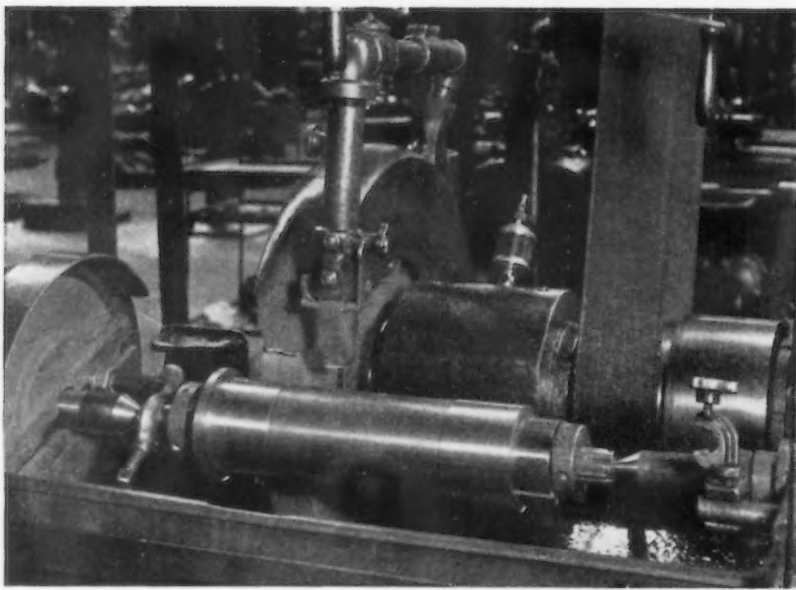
External grinding of the aluminum bronze bushing shown in Fig. 11.
